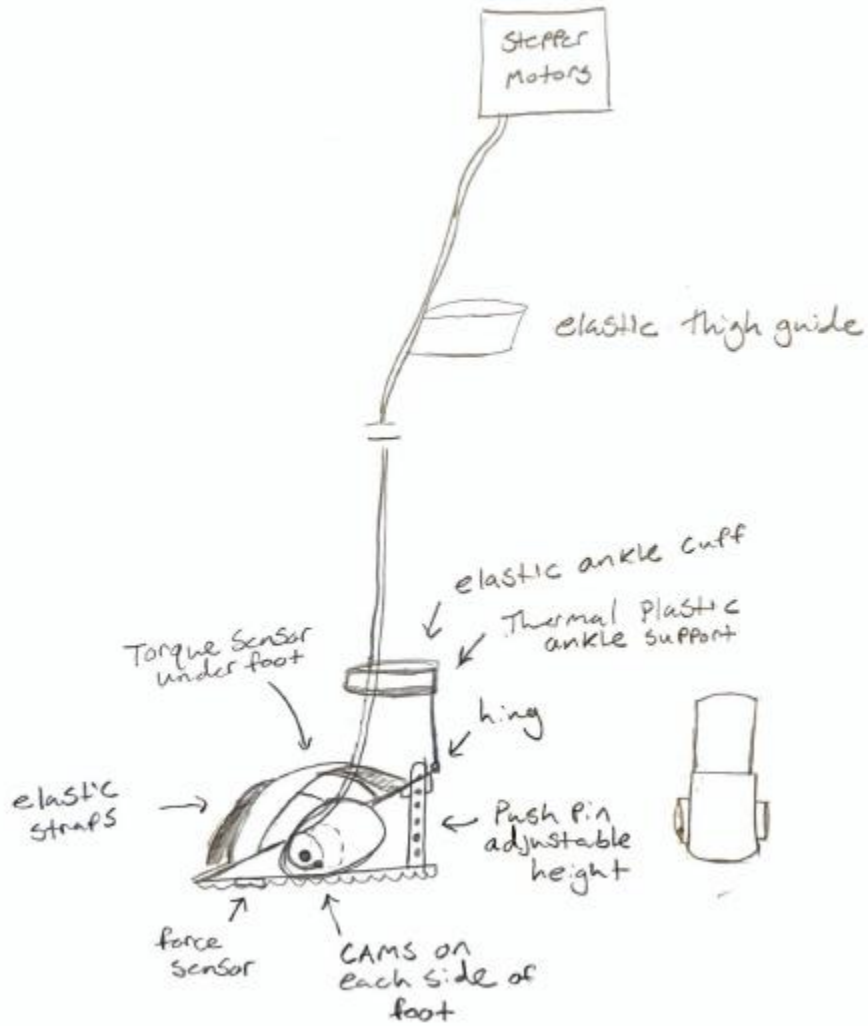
Design concept incorporating side-mounted cams, push pin adjustable height, and force sensors
